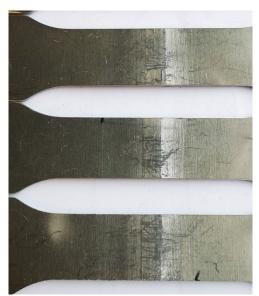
b). Lower specimen "I" in figure b) is rotated 180 degree having the retracting side at the left. The failure after tensile test for the specimen I is in the TMAZ/HAZ, the failure is partly inside the weld area and goes to the edge of the weld. Specimen III, IV both failed in the weld area.
